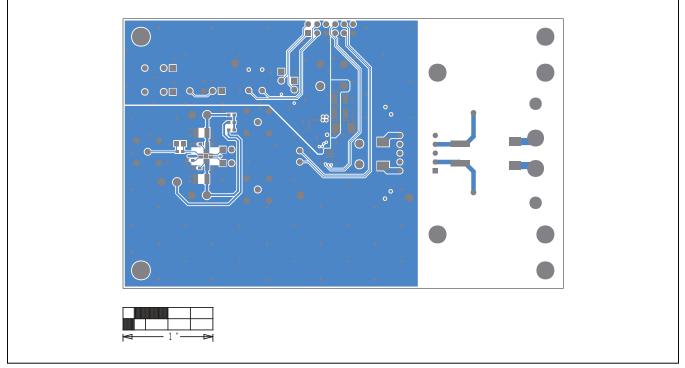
MAX44211 EV Kit PCB Layout—Solder Side
